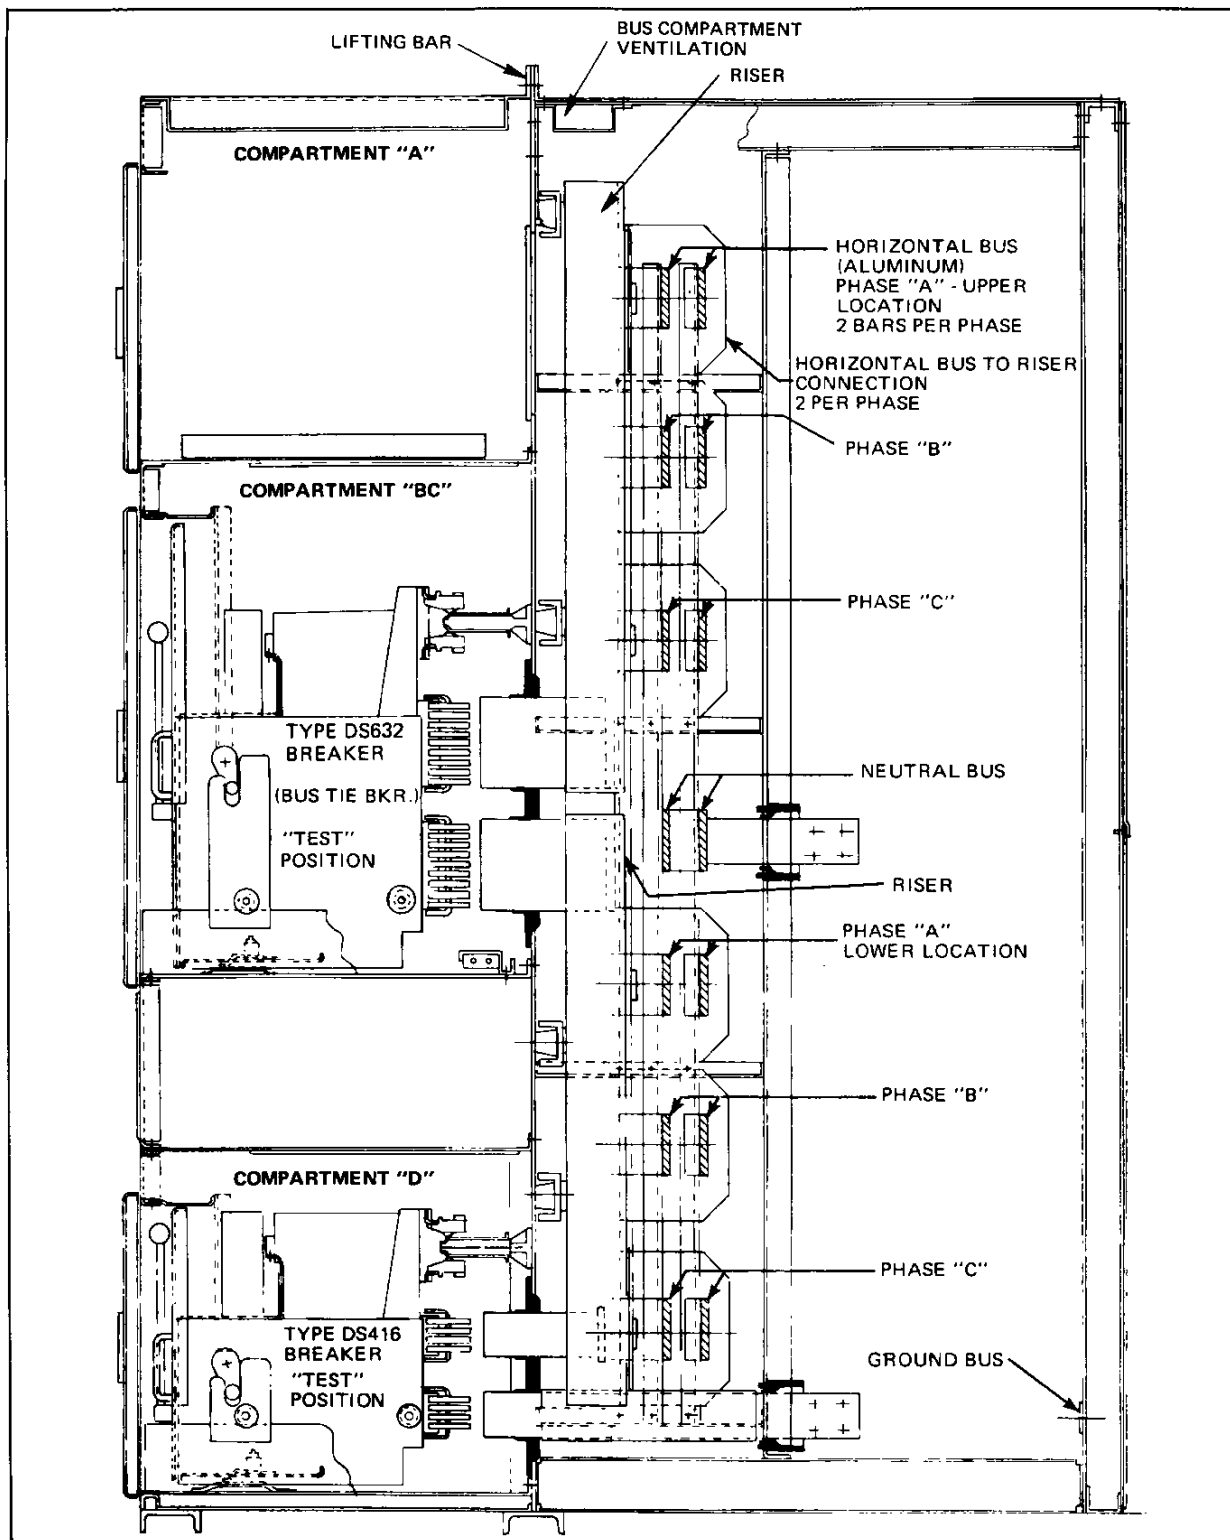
Side View 3000 Amp Unit with Welded Aluminum Bus Risers Arranged as a Bus Tie Unit
